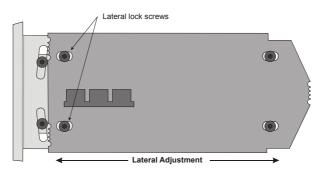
Cat. No. 1034 CCD Board Lateral Lock Screws
